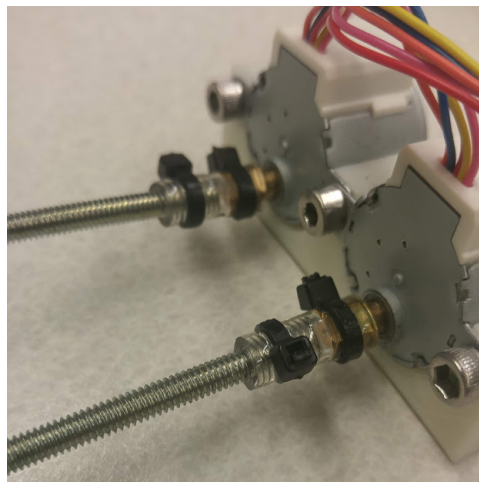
Coupling between the stepper motors and threaded rod with a piece of rubber tubing and zip ties.
